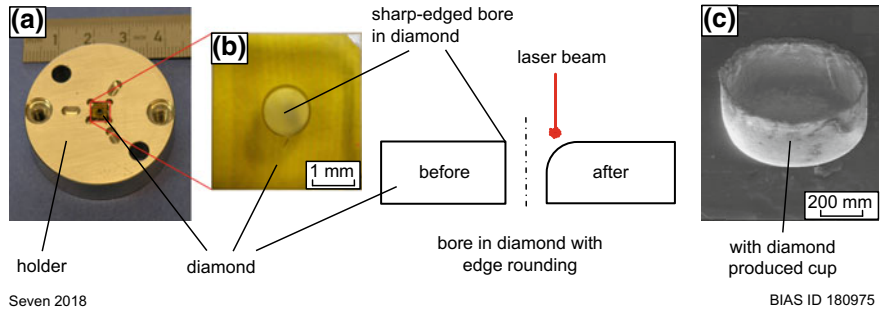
Tool holder for diamond die (a), diamond die with laser-produced die radius (b) and with diamond die produced cup (c)
